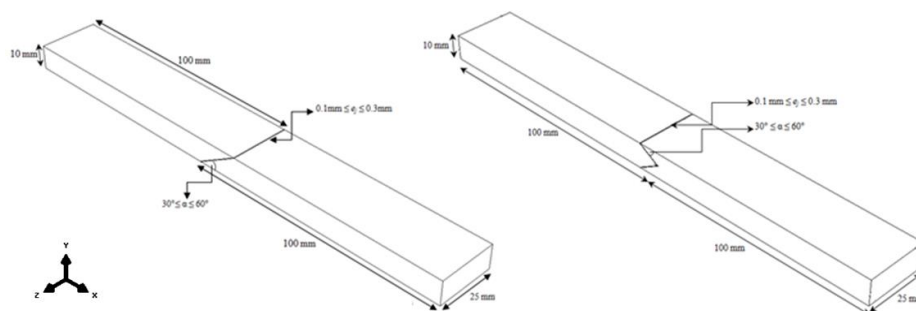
Bonded joint geometrical model with the plate and the adhesive dimensions
